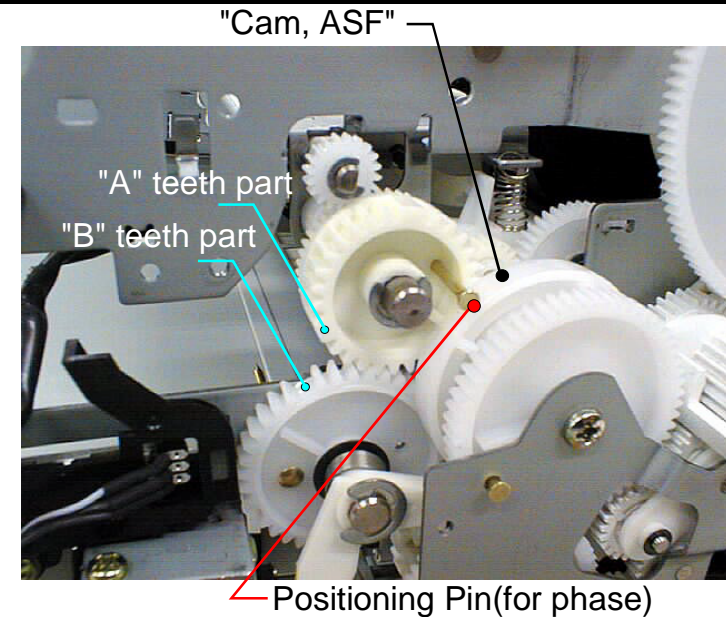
Arranging Alignment between "ASF Unit" and Gear Train
